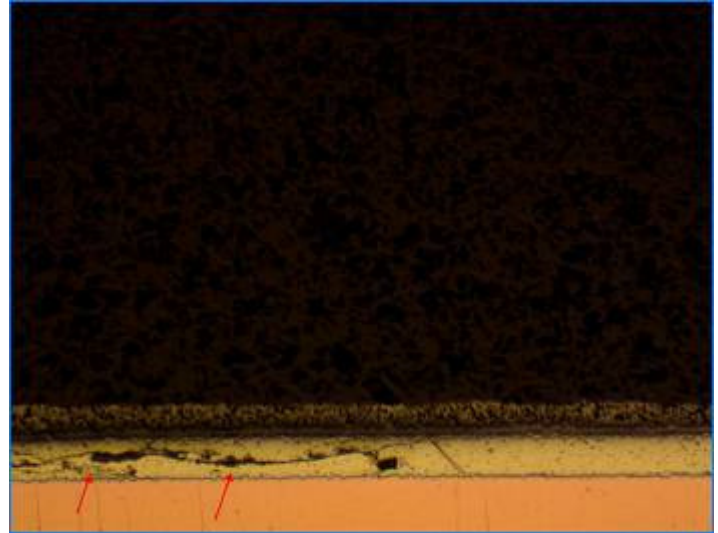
cross section, SN67, U52, left lead solder crack, 200xb
